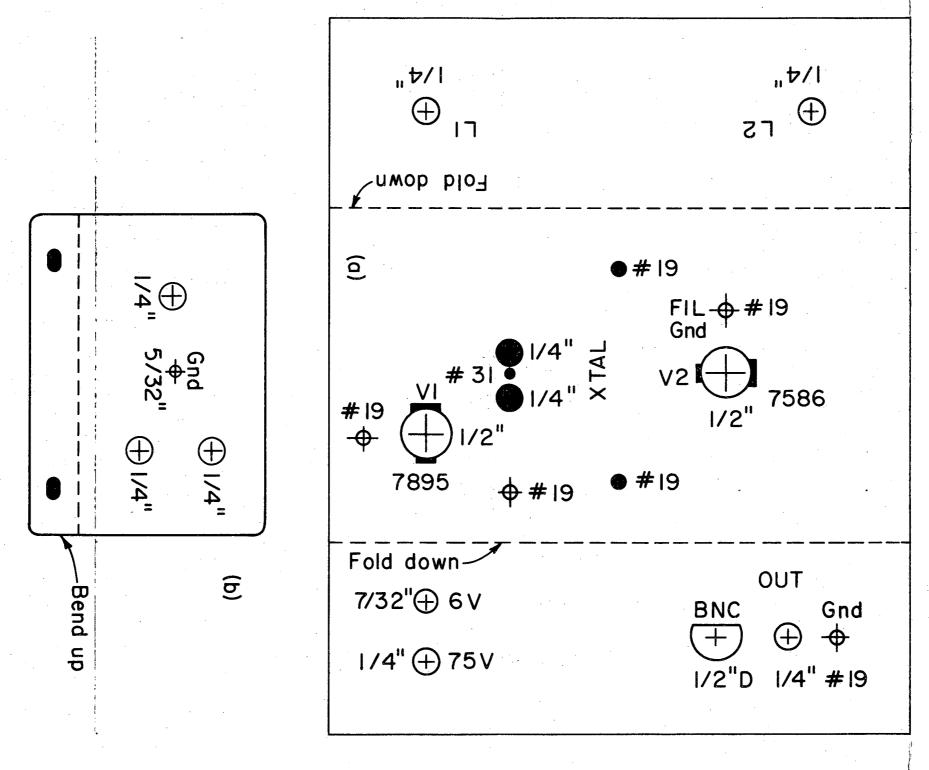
Layout templates for rf lock-in generator unit: (a) generator, and (b) intercompartment plate.
